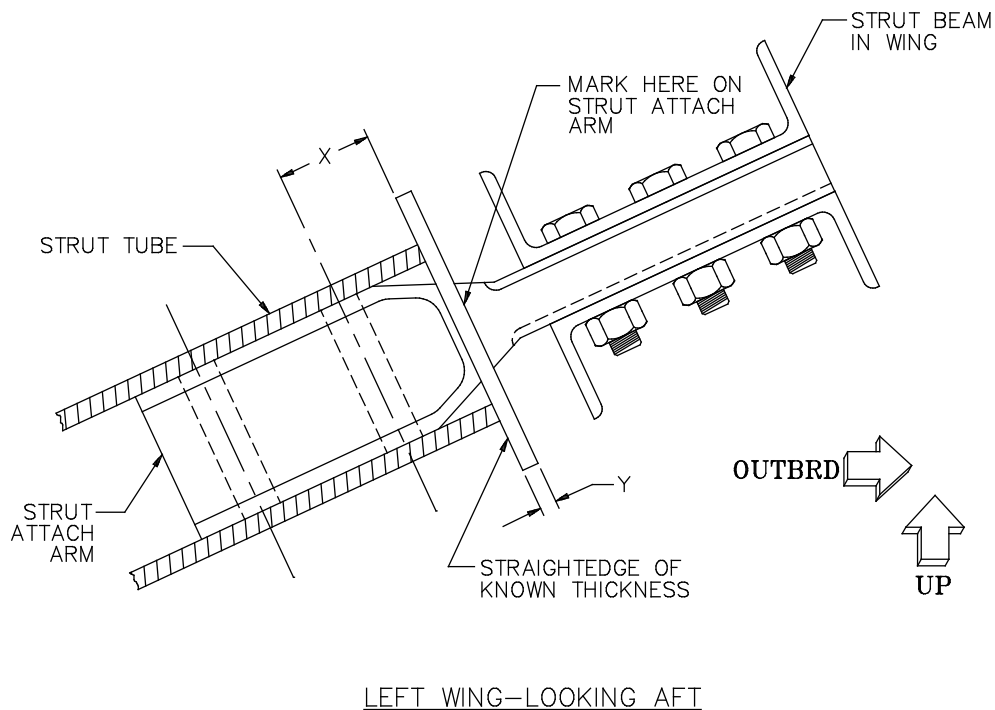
Marking Strut Attach Arm at End of Wing Strut Tube
